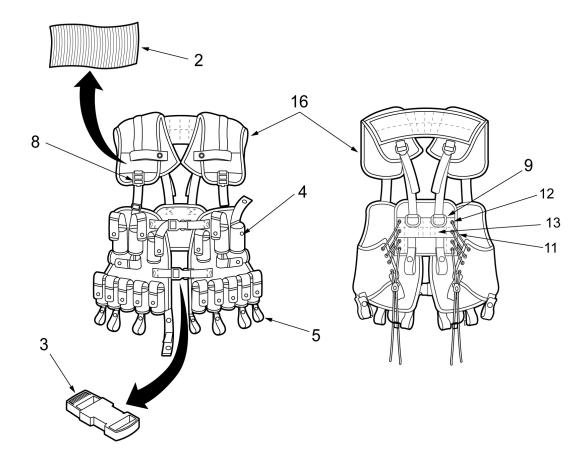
Load-Bearing Equipment (Sheet 2 of 3).
